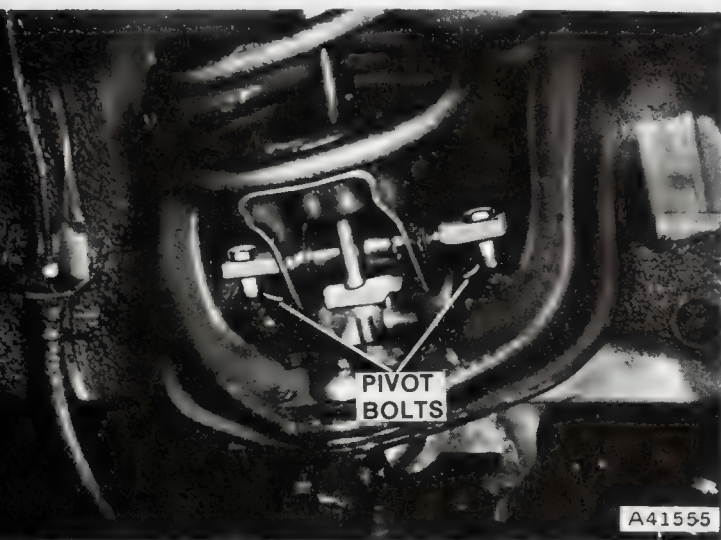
M-19 Aligning Spring Seat Pivot Bolts
